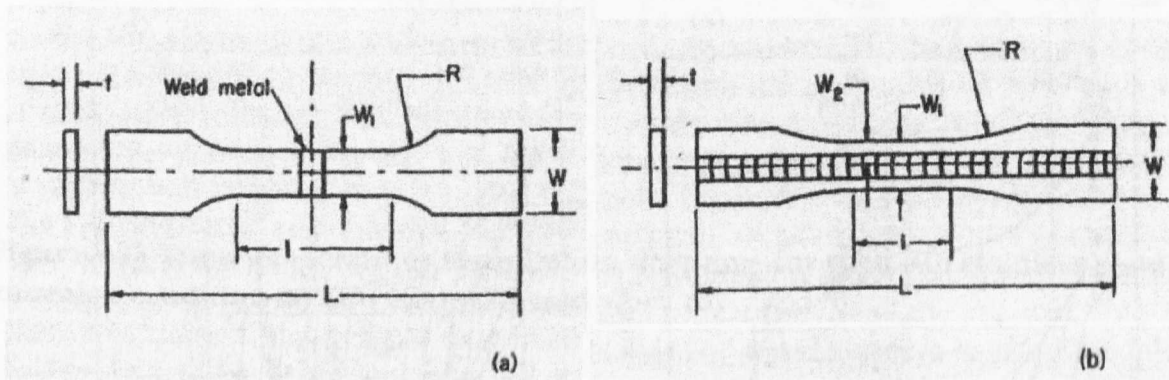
Schematic illustrations of (a) transverse cross-weld and (b) longitudinal cross-weld specimens [26]
